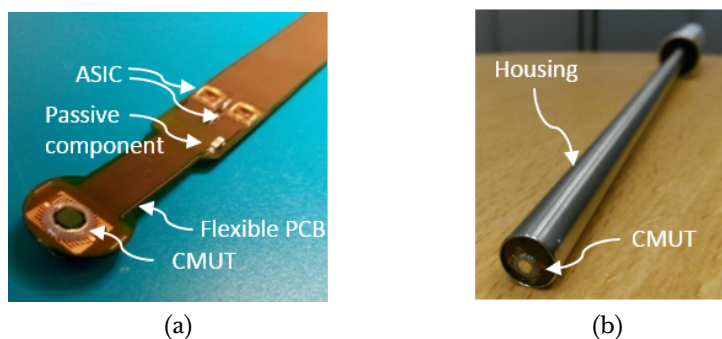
Photograph of the CMUT array mounted on a flexible printed circuit board (a) integrated in a probe prototype (b).
